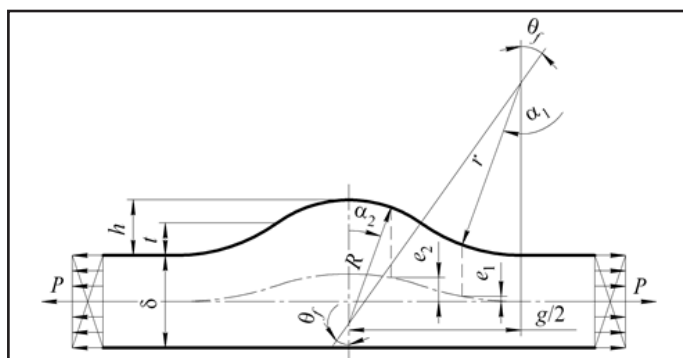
Geometrical parameters of the ideal butt welded joint with one-sided excess weld metal
